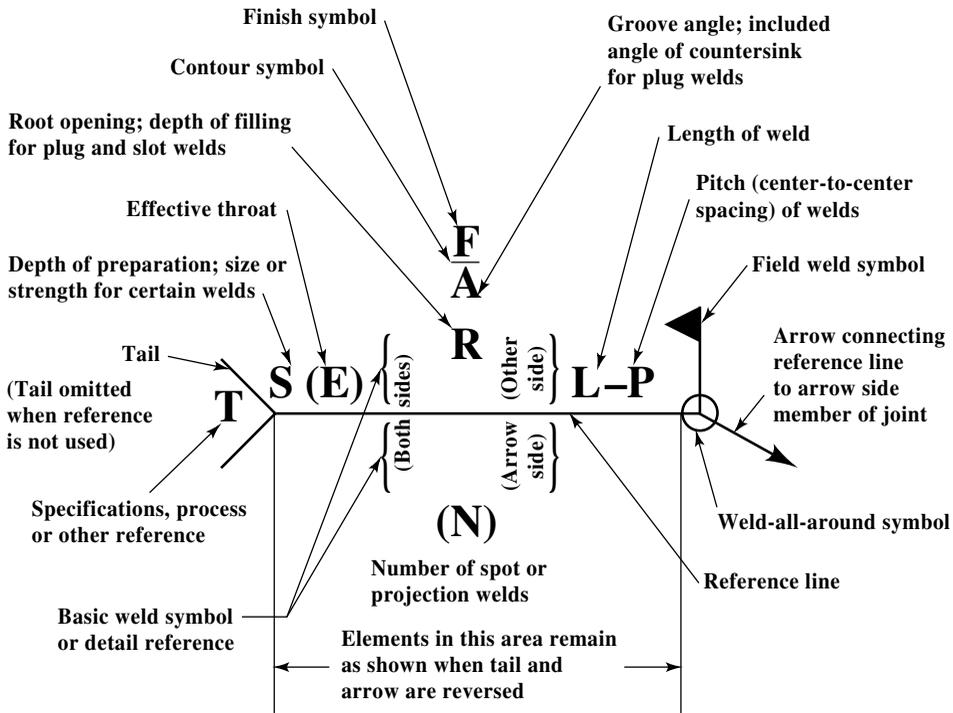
Standard Location of Elements of a Welding Symbol
